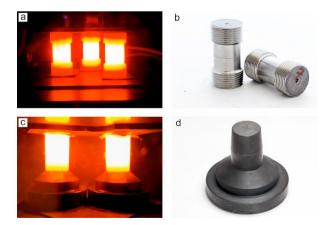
Diffusion bonding procedure (a) for the tensile specimens (b) and the bonding (c) of MMC component and tool (d) complete tool after machining and hardening with a height of 80 mm
